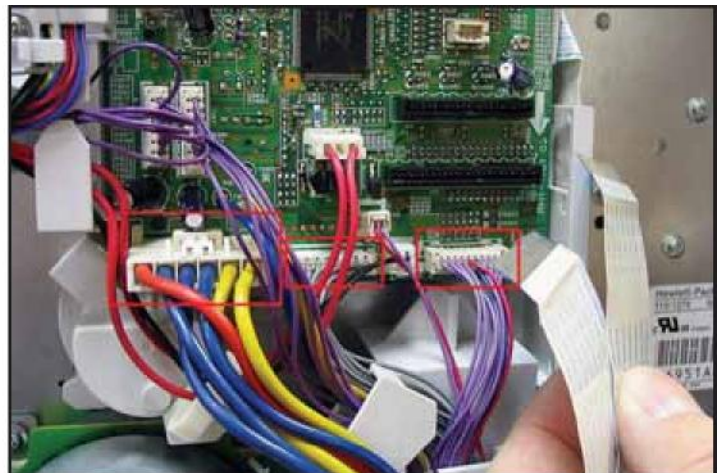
The two white ribbon cables (being held) and three multi-colored cables (red boxes) must be removed from the DC controller.
